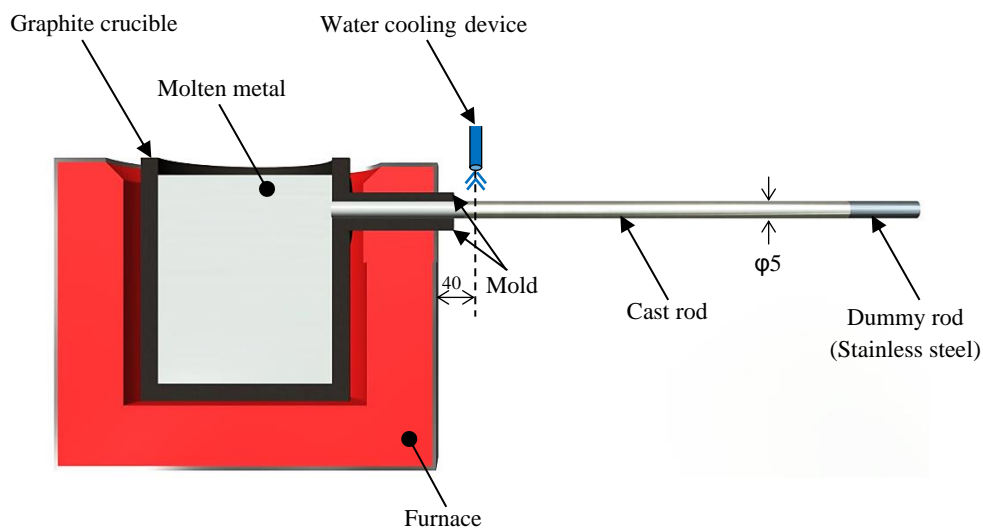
Schematic illustration of the heated mold continuous casting device.
